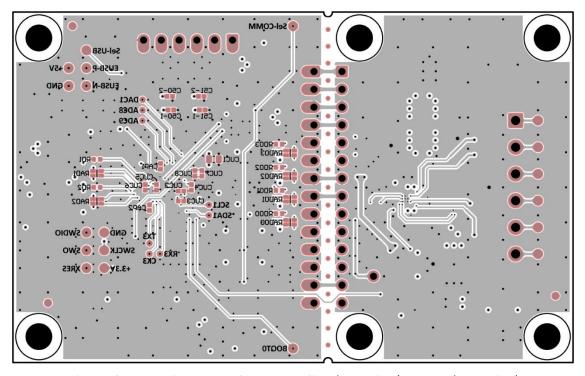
Layout view – Layer 6 - Bottom – Signals, Routing (not to scale, top view)
